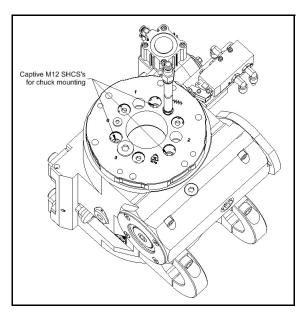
ATTACHING THE OD MOUNT ASSEMBLY TO THE MAIN BODY
